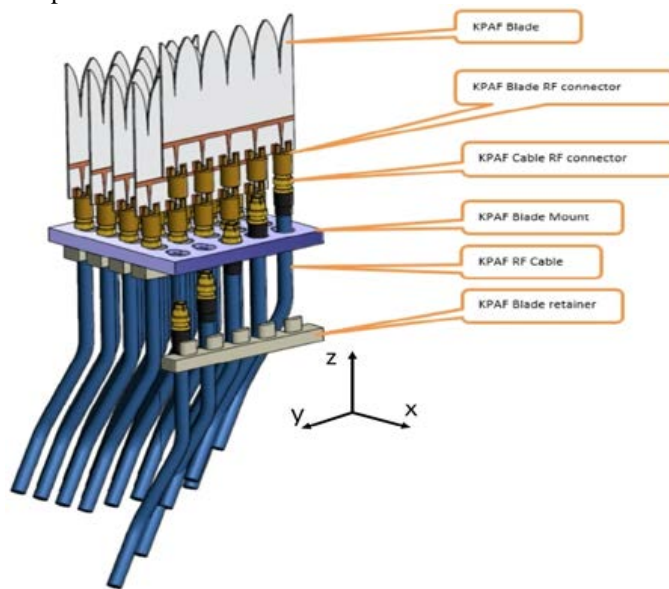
KPAF 5x5 array mechanical mounting design, expanded view.
